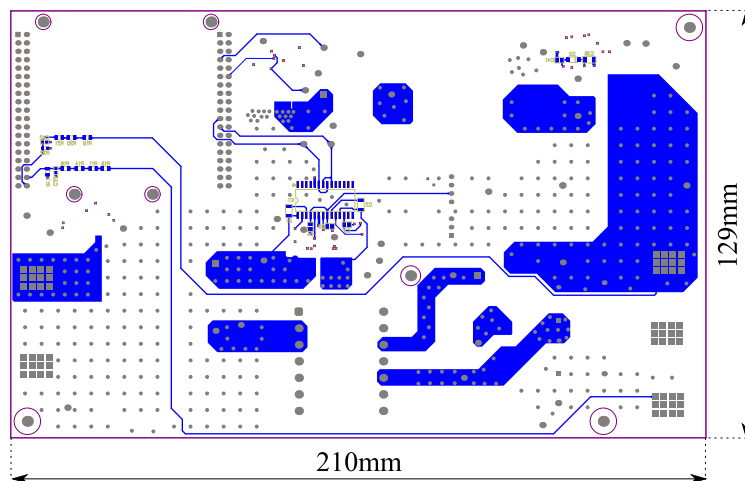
Layout of the bottom layer of the PCB prototype.
